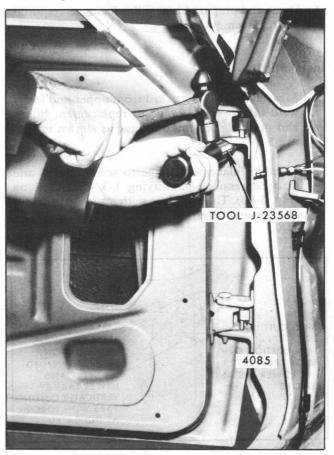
Door Hinge Pin Removal - "H" Styles
